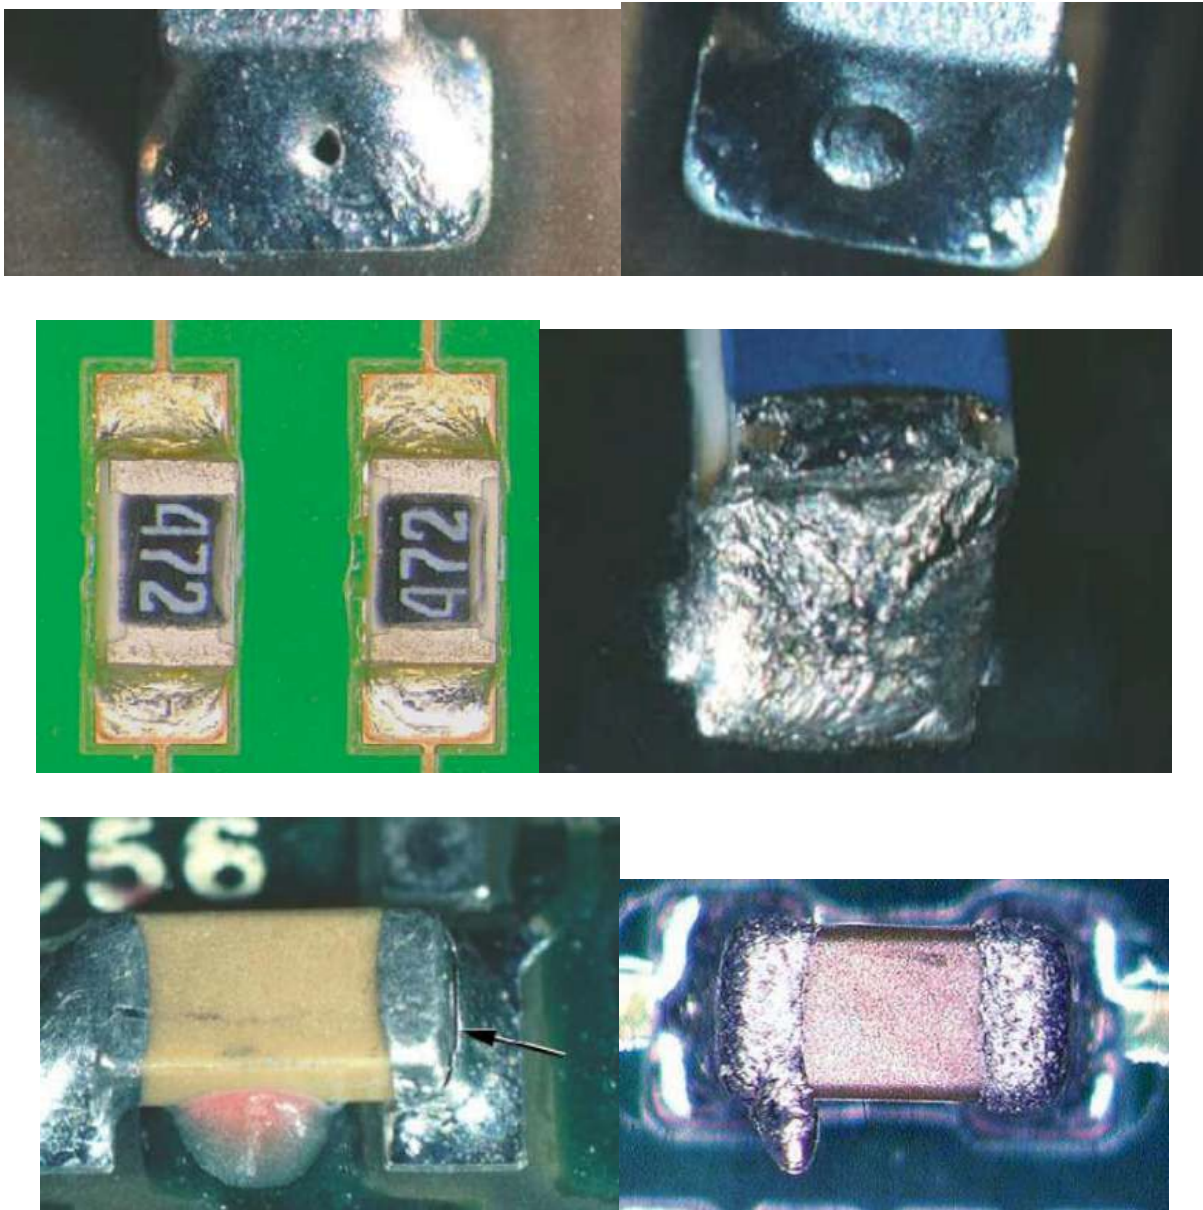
Voiding/ disturbed/ fractured/ solder spikes solder fillets Less than 90% wetting of terminal edges
